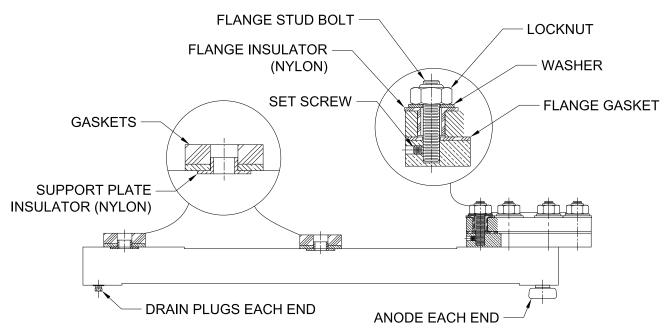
Z-Option Multi Pass Gridcooler Keel Cooler
